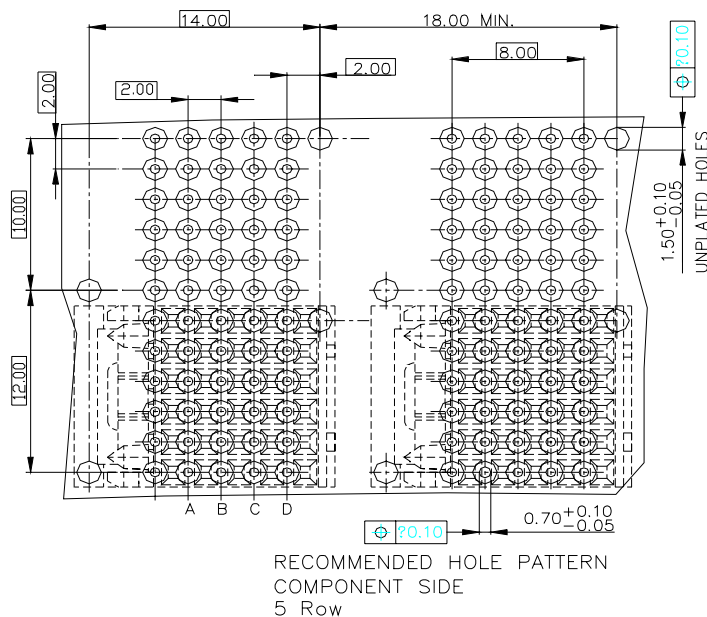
Board layout for right vertical solder to board receptacles (all dimensions in mm)
